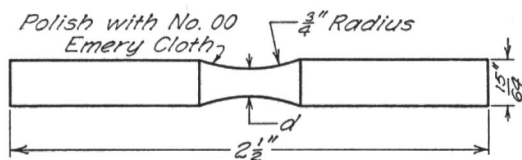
SPECIMEN FOR KROUSE HIGH-SPEED ROTATING-CANTILEVER FATIGUE TESTING MACHINE
